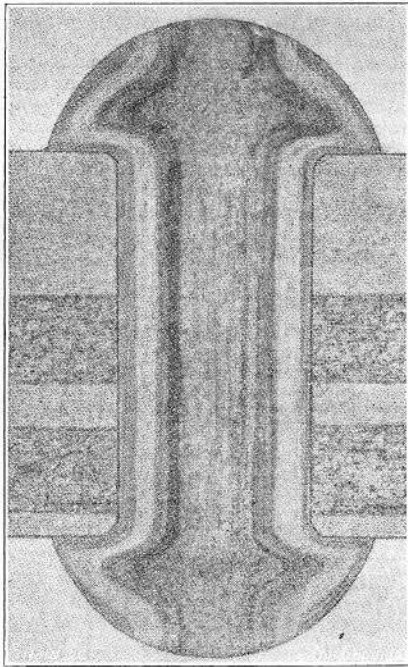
Sulphur Impression of Pin Rivet Joint.
